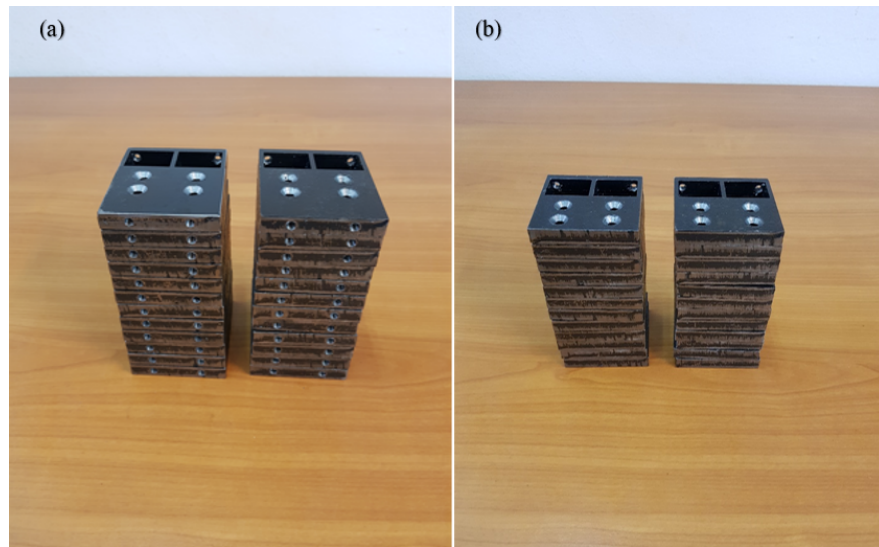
24 pieces of a) short wall, b) long wall.
